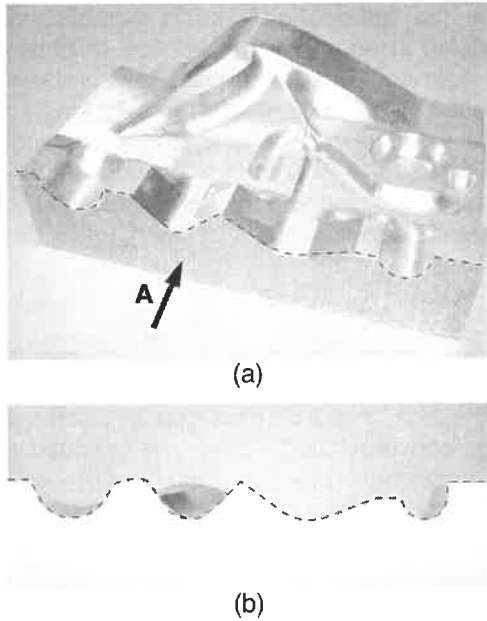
(a) Machined mould profile; (b) trajectory profile view from A.
